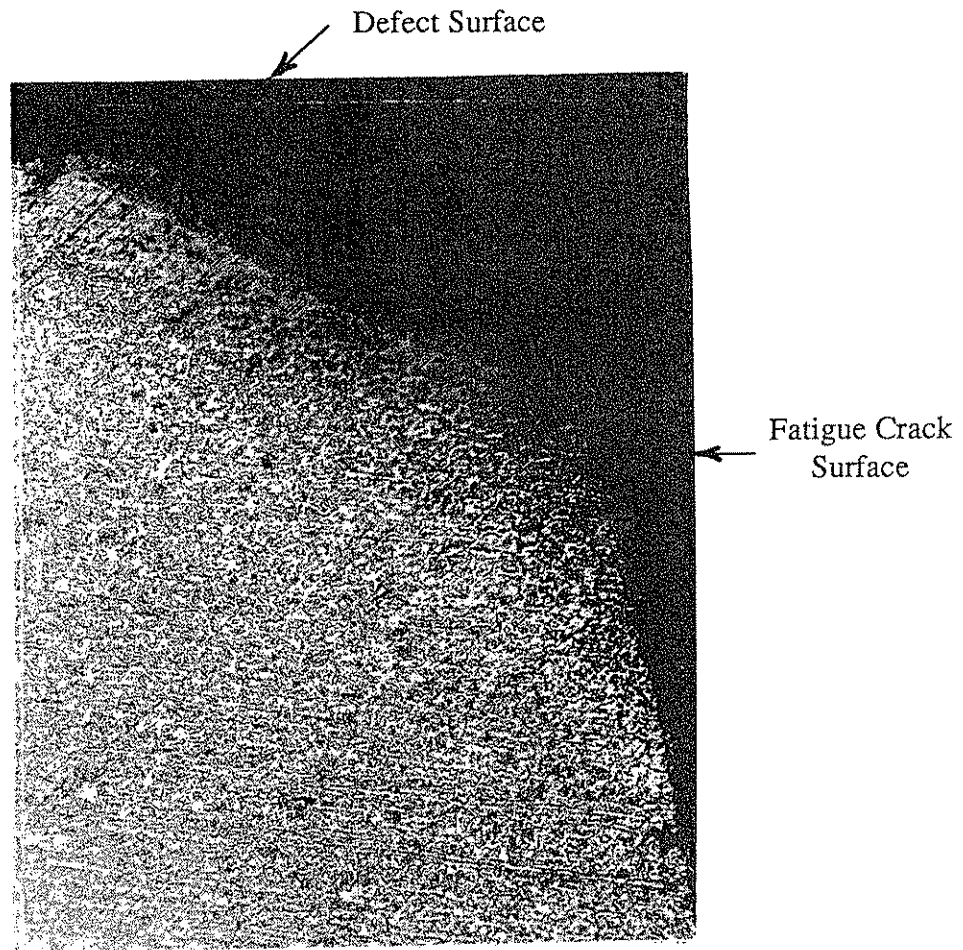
Polished and etched section per perpendicular to crack surface to crack surface showing defect and HAZ @40x.
